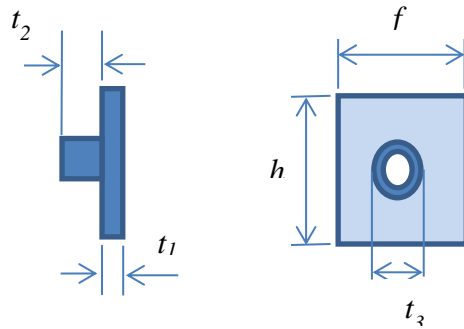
Front and side elevation of the second stage cylinder piston
